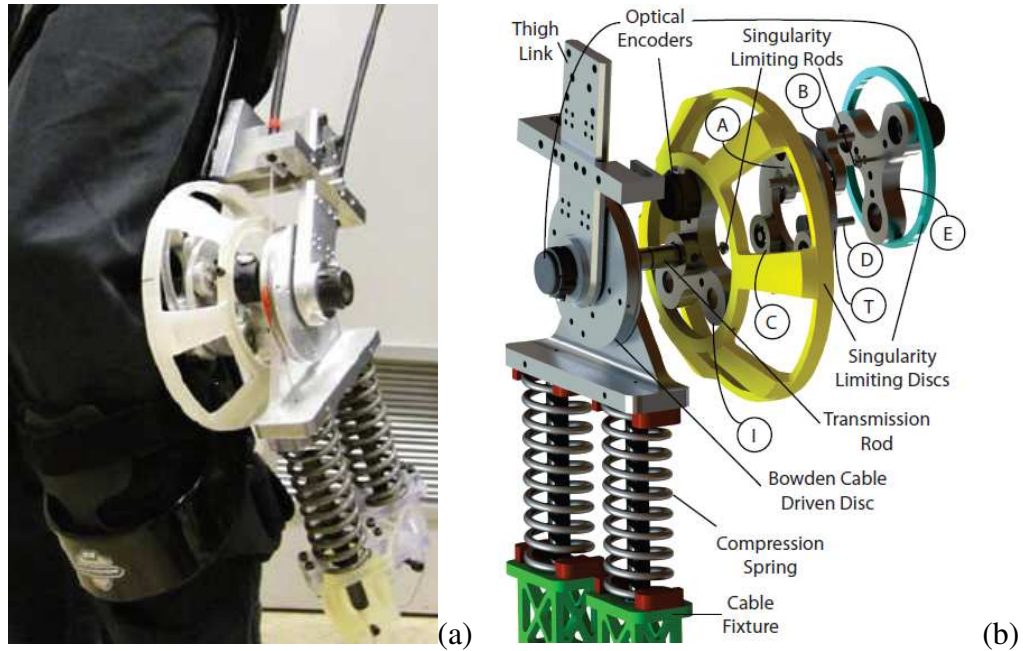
(a) AssistOn-Knee joint, (b) exploded view with identified components [17]. © 2013 IEEE.
